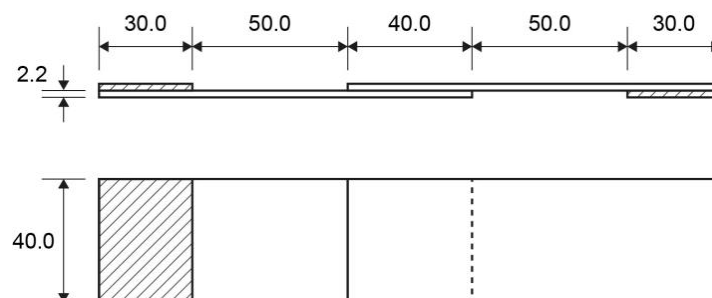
Dimensions in [mm] of the single lap shear specimens.
